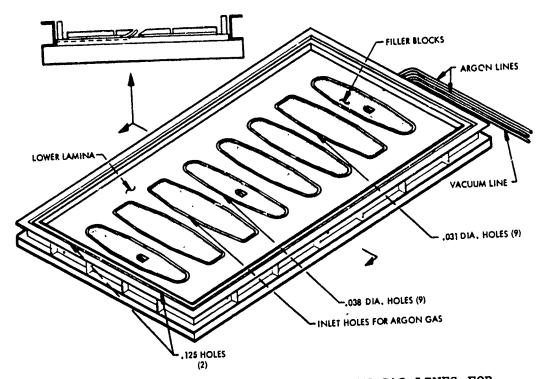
BRAZE BOX TOOLING ILLUSTRATING CAUL SHEETS, ARGON LINES AND VACUUM LINE
